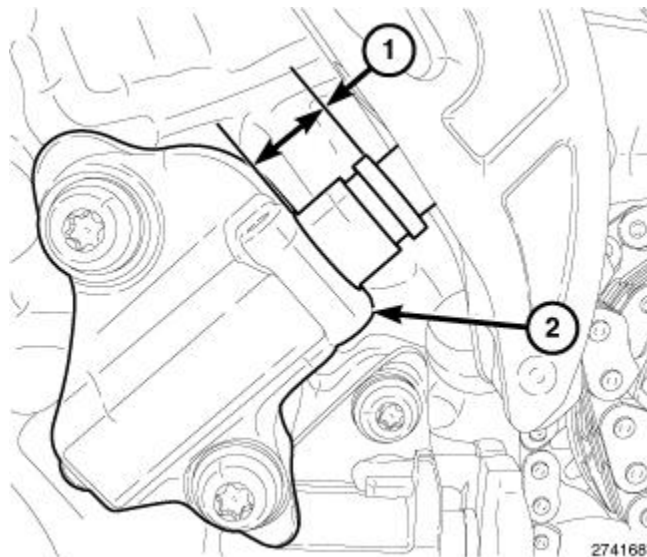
Piston Extension & Right Hand Cam Chain Tensioner
